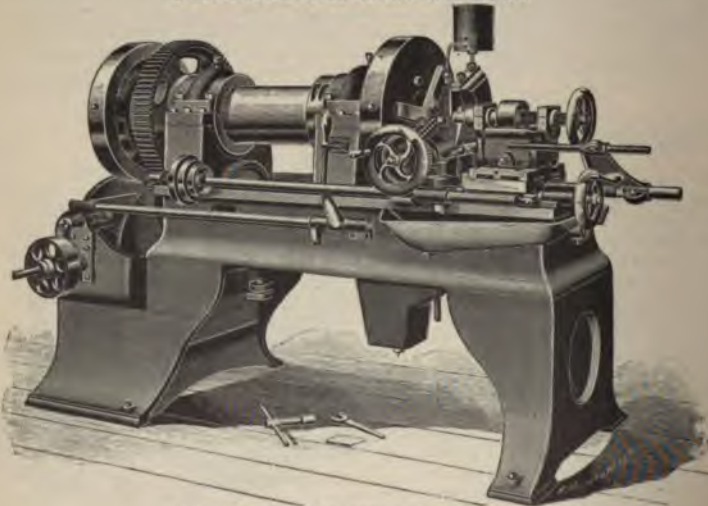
SHOWS CENTERING ATTACHMENT.
